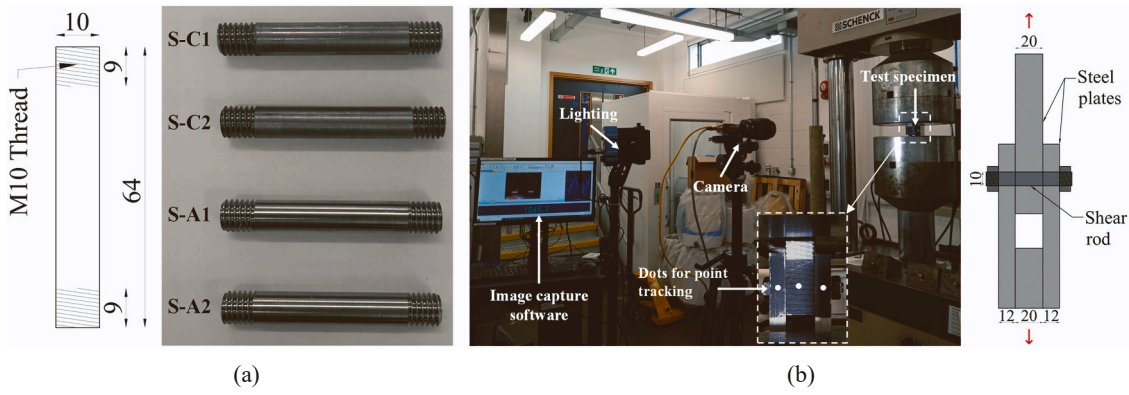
(a) Dimensions of shear specimens in mm; (b) Double shear test setup.
